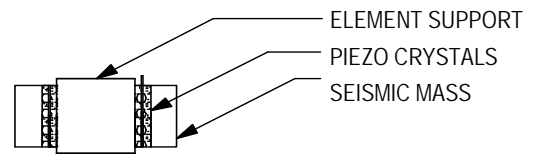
Representative cross section, 3316C1 element assembly. (Refer to Outline/Installation drawing 127-3316C1 provided with this operating guide for a detailed outline representation of Model 3316C1).
